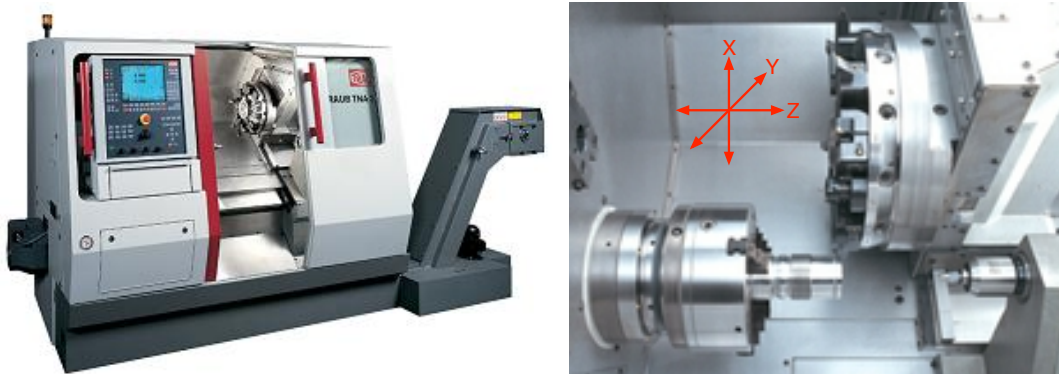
Three axes configuration in lathe and turn-mill machine
